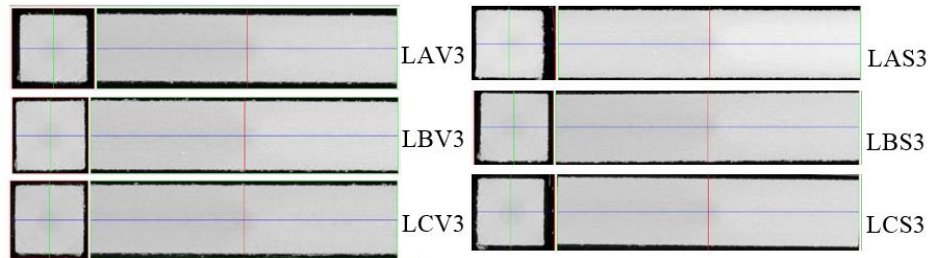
Transverse and Coronal views of low-level energy density vertical-build specimens (left) and slant-build specimens (right) at different build locations
